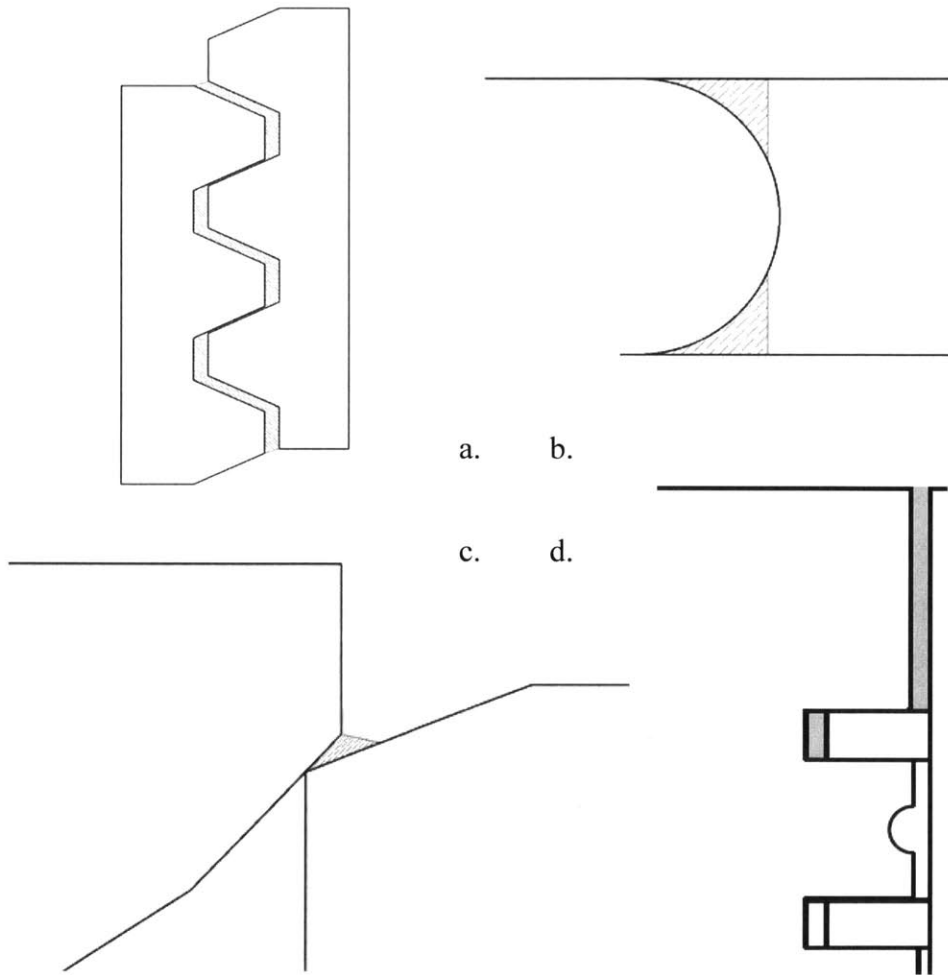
Drawings of (a) spark plug thread crevice, (b) head gasket crevice, (c) valve seat crevice, and (d) piston crevice.
